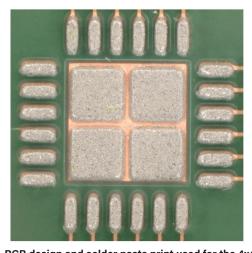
PCB design and solder paste print used for the 4x4 mm QFN test vehicle 1. IO pads were printed 1:1.
